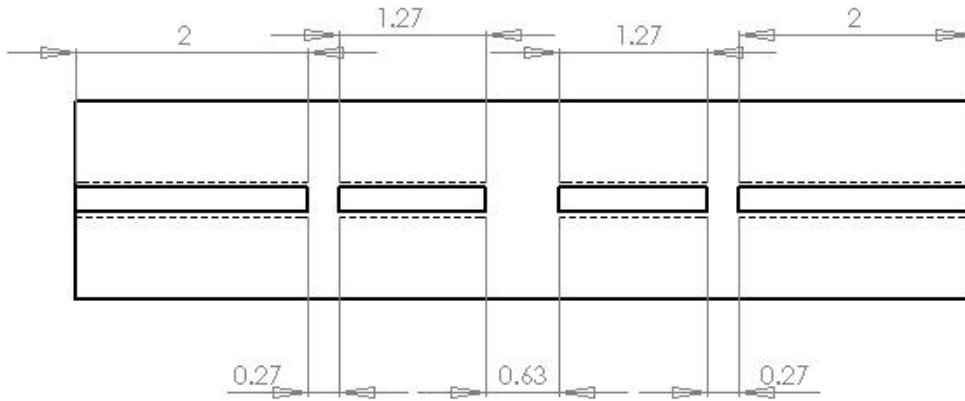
Technical drawing, longitudinal view of the 2-pole filter (dimensions in mm).
